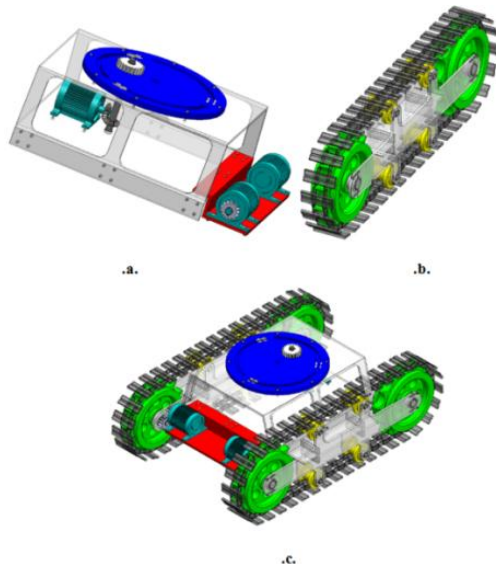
a. The chassis frame b. The tracked wheel system c. The mini-vehicle chassis.
